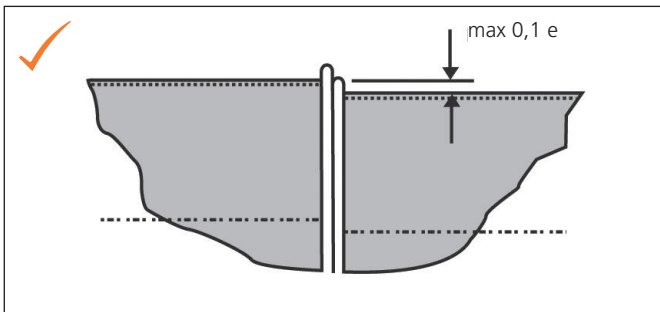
Butt-weld with mis-alignment of pipe (acceptable)
